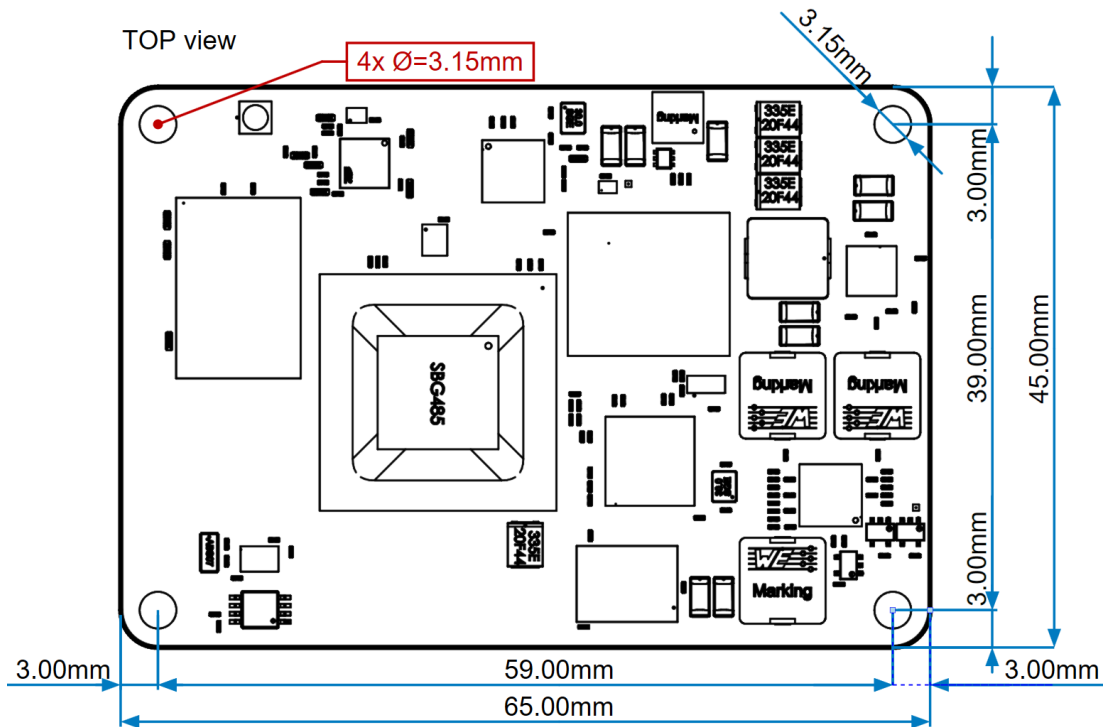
RCHD-PF Top View Mechanics in millimeters
